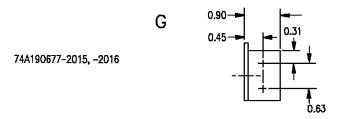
Transmission Seal Assembly, 74A190678, Replacement (Sheet 3)
